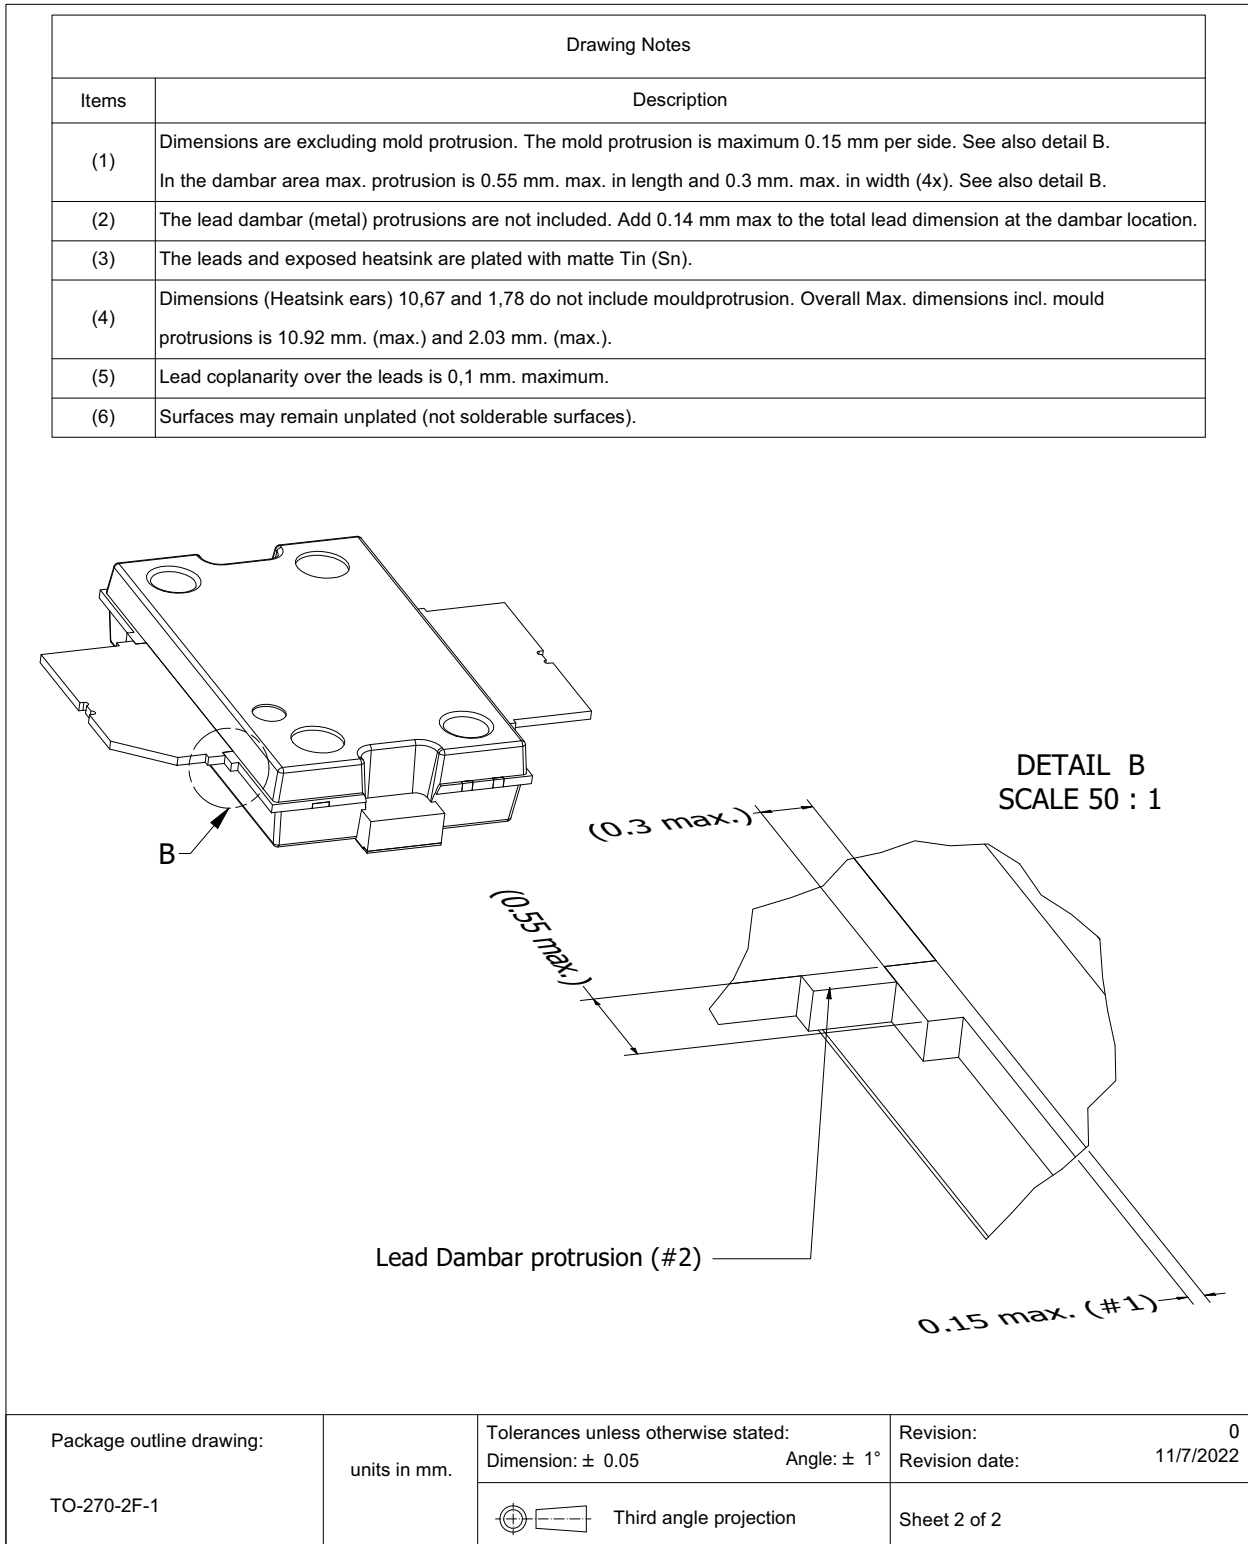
Package outline TO-270-2F-1 (sheet 2 of 2)
